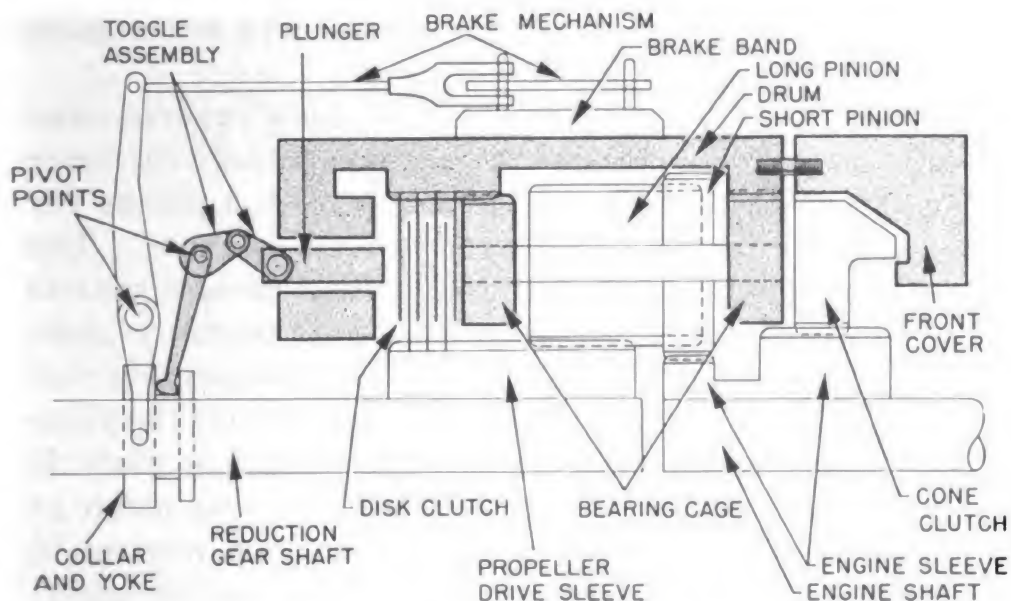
Schematic diagram of Joe's reverse gear assembly.
